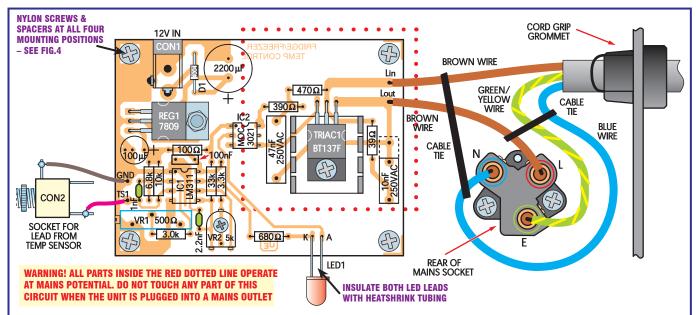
this combined component overlay and wiring diagram should be all you need to put the CoolMaster together. Secure any mains wires together with cable ties – just in case. Remember that components and tracks inside the dotted red line above are at mains potential when operating – never connect power with the case open.
